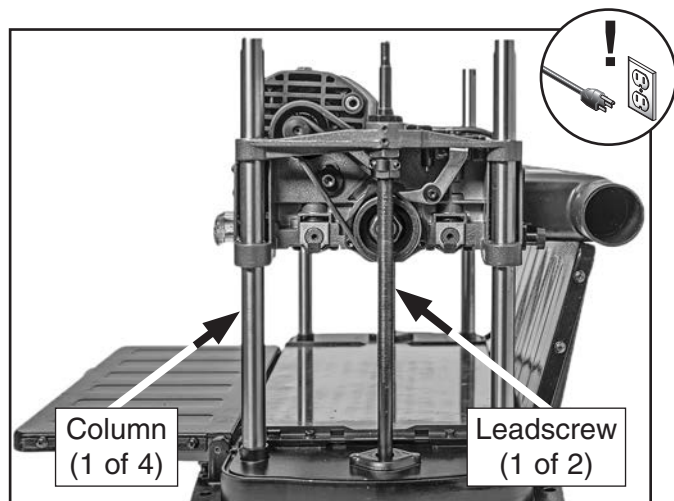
Location of cutterhead elevation leadscrews (G0939 shown).
